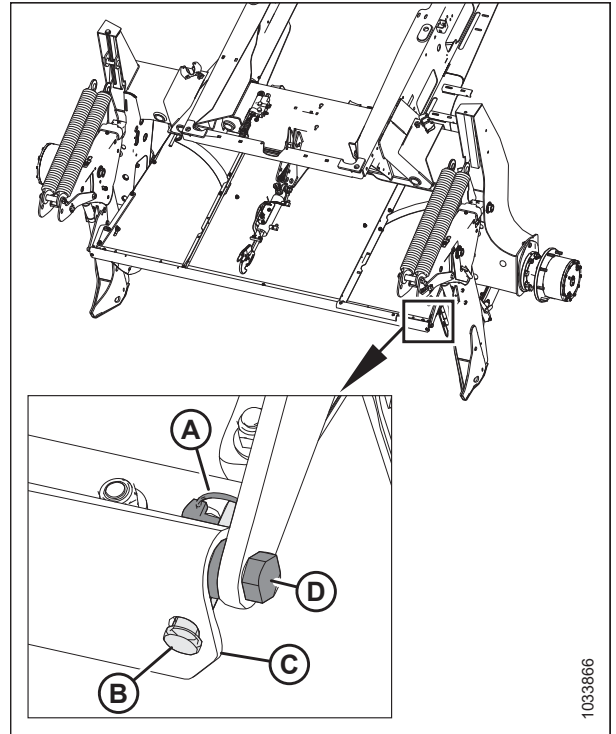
Forming Shield Secured to Front of Windrower Legs
